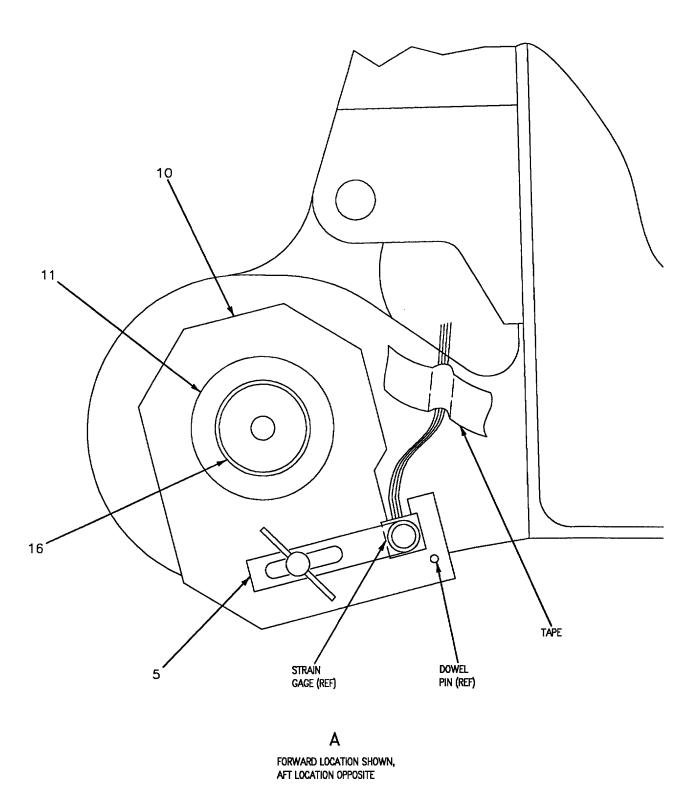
E92111 Strain Gage Bonding Fixture (Sheet 2)
